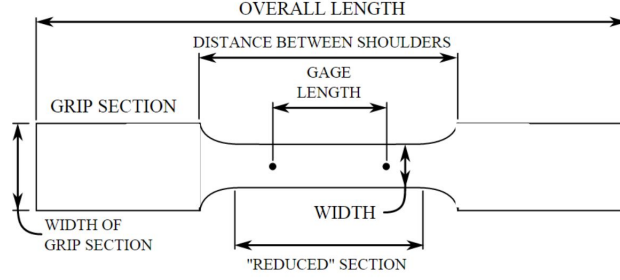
Typical tensile specimen, showing a reduced gauge section and enlarged shoulders [23].
